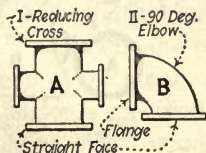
Low-Pressure Cast-Iron Fittings.
